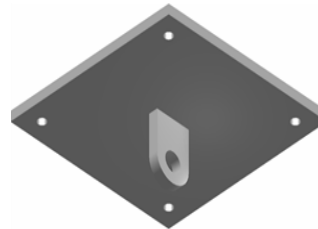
CONCRETE ATTACHMENT PLATE W / WELDING LUG
